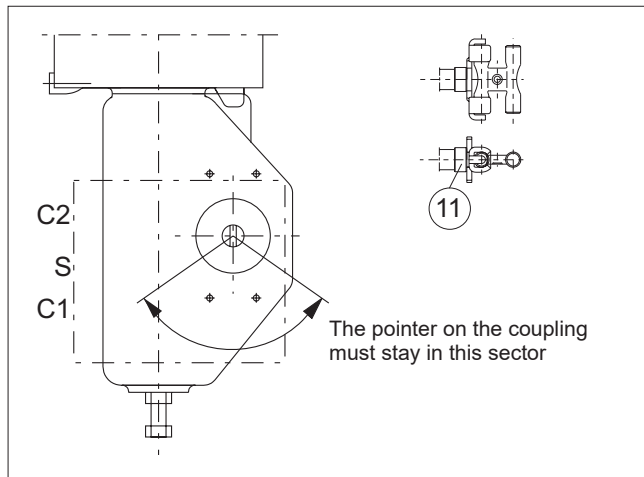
Mounting on Neles actuator with VDI/VDE mounting face
